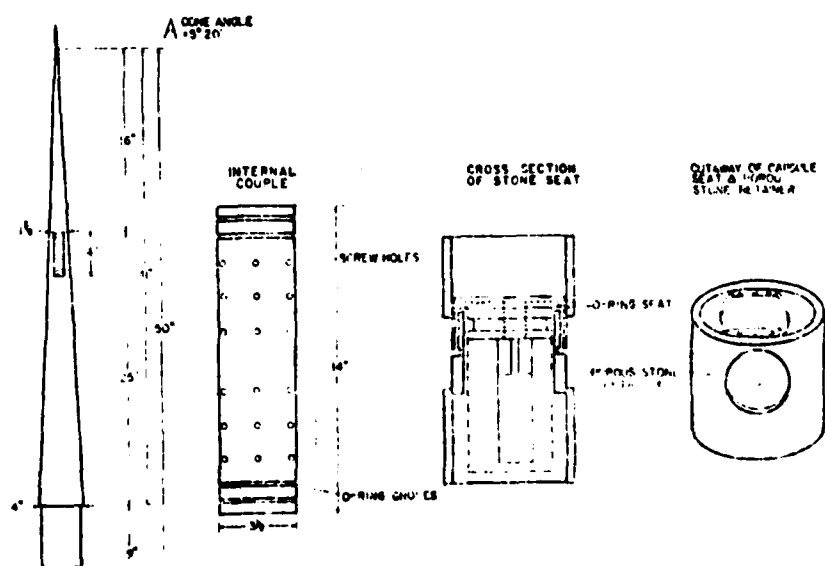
Detailed probe tip design specifications, internal couple, filter seats, and capsule placement in pine.
